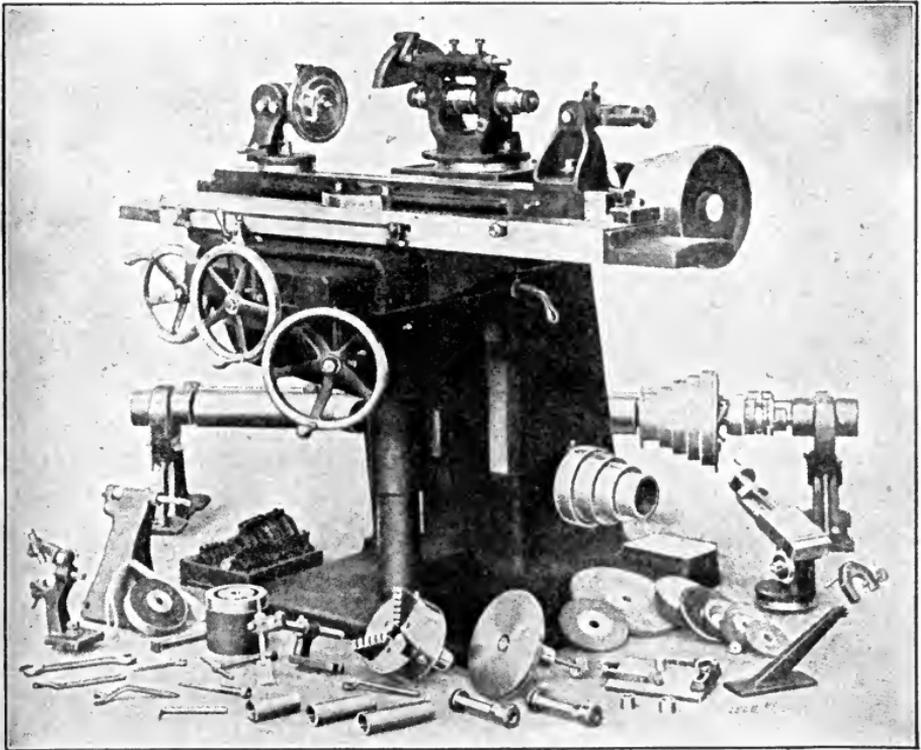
"Cincinnati" No. 2 Universal Cutter and Tool Grinder
